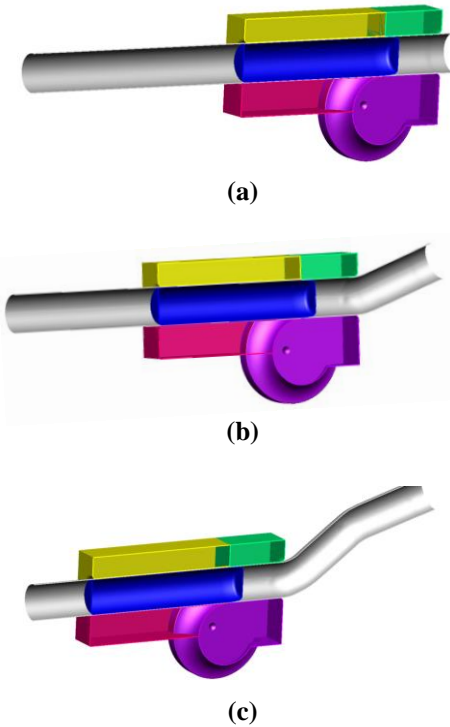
FE model for tube bending process (a) first bending (b) second bending (c) third bending
